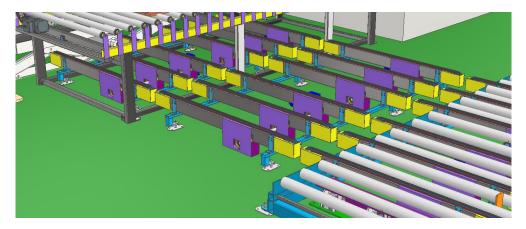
Image from the wooden sheets going out of the sanding machines to the belt roller conveyor.
